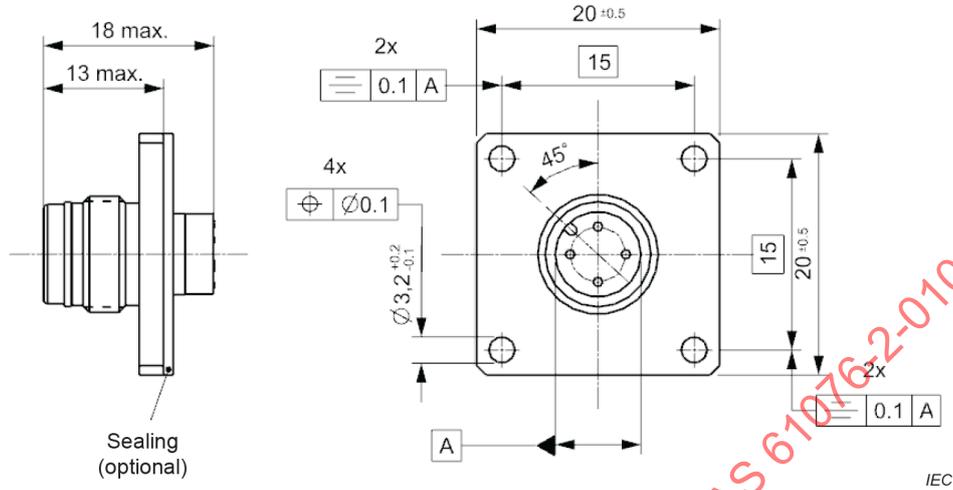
Fixed connector, male contacts, mounting with thread M12 × 1 and outer push-pull locking, square flange front mounting
